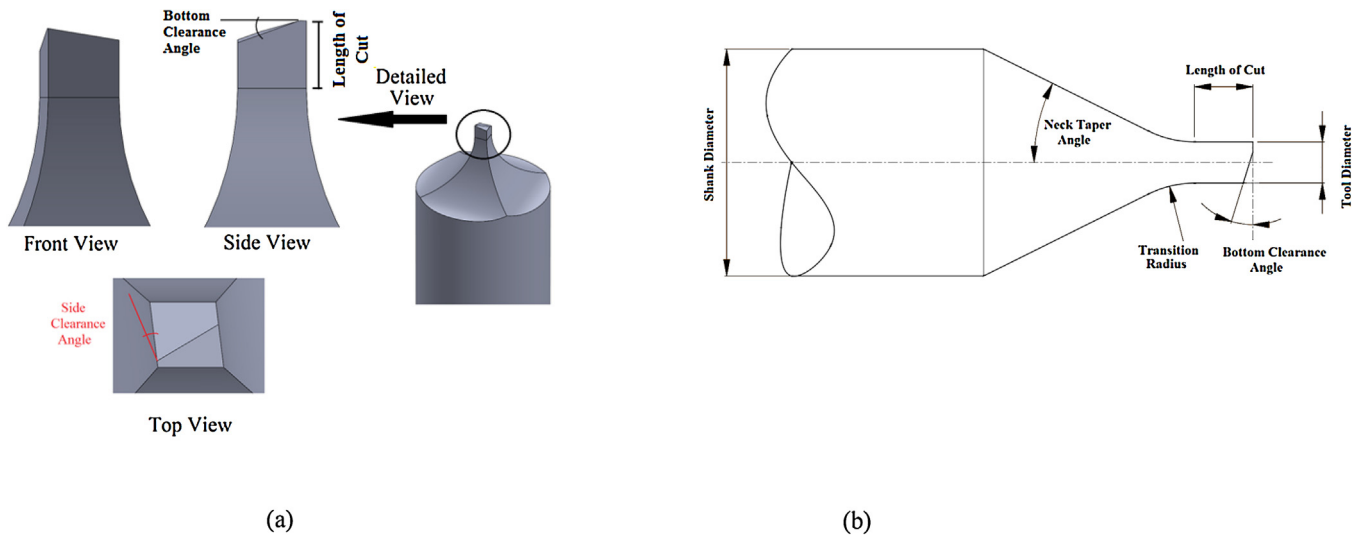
(a) Geometry of the designed single edge cutting tool, (b) Design parameters of the tool.
